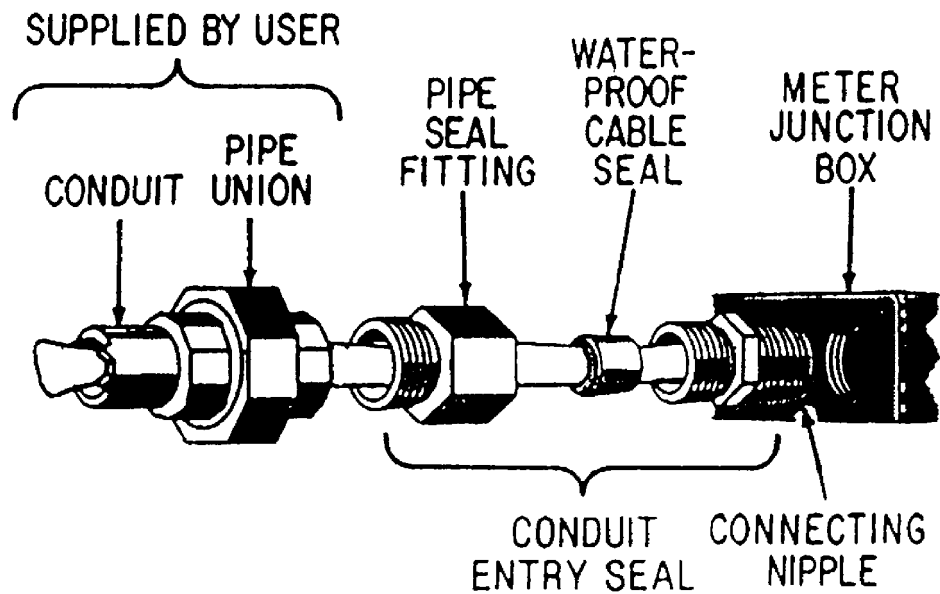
CONDUIT ENTRY SEAL INSTALLATION
